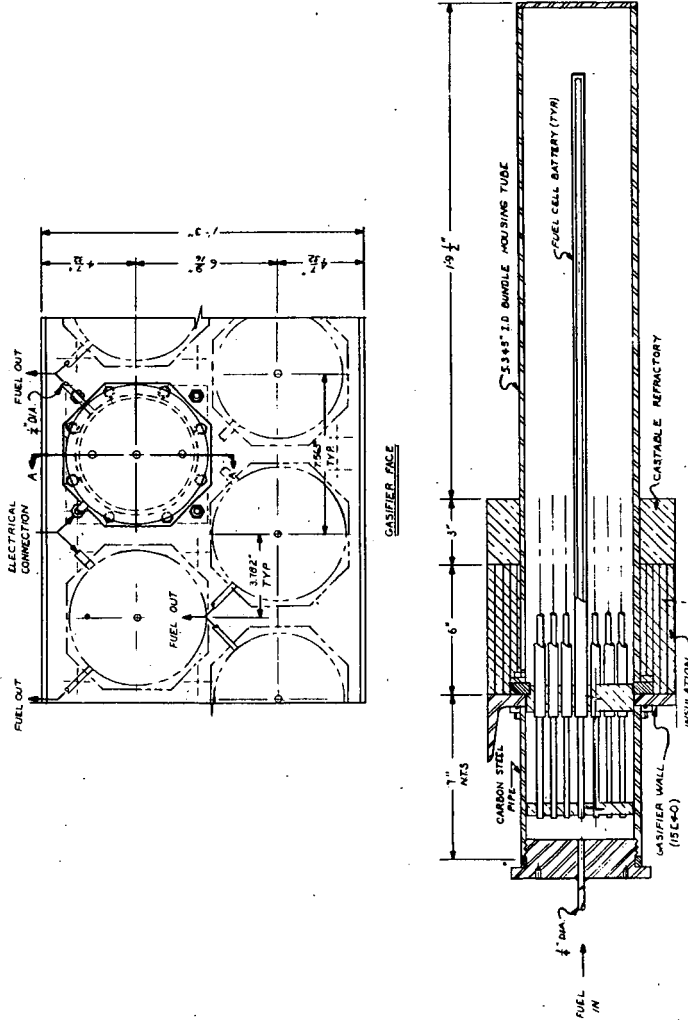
FUEL CELL BUNDLE ASSEMBLY
